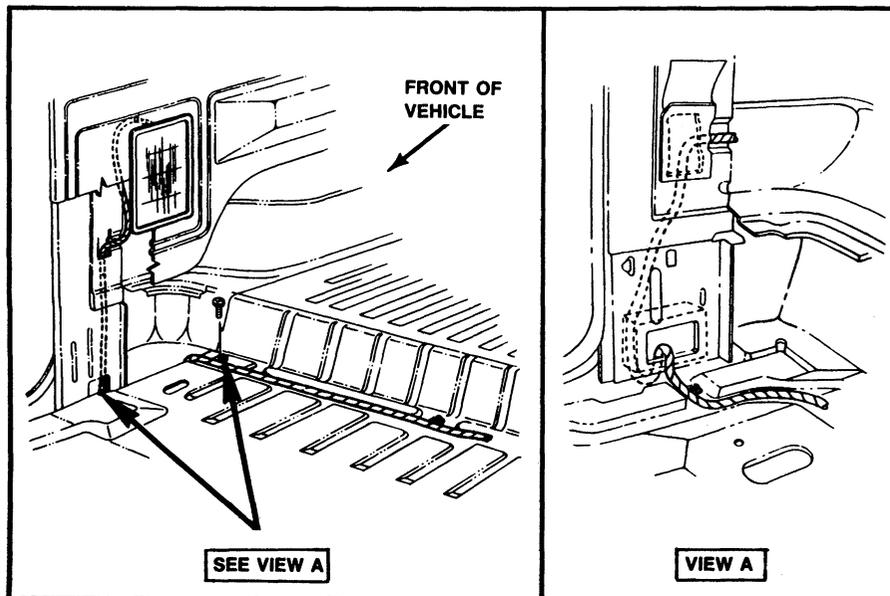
Rear Sear Speaker R.H. Side (Bronco)
